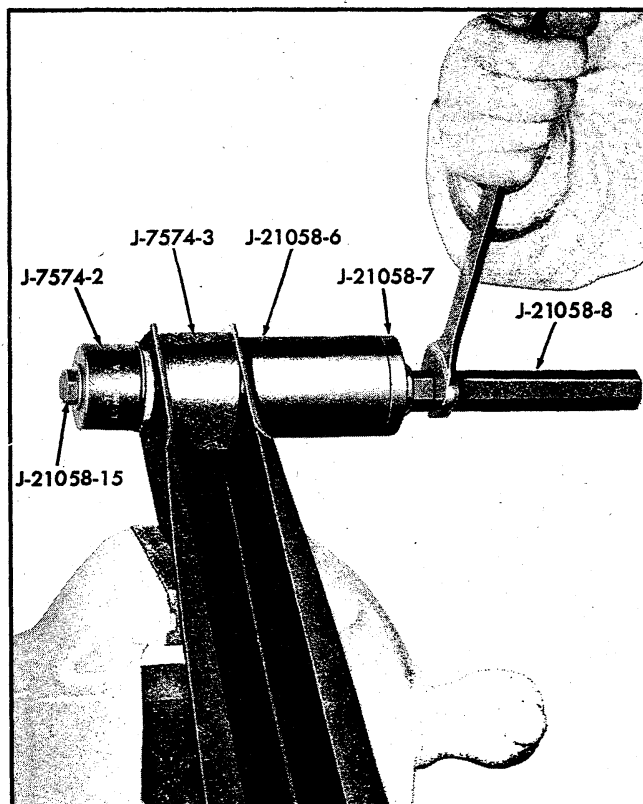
Lower Control Arm Front Bushing Installation (Chevrolet)
